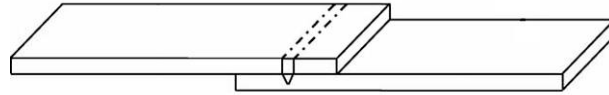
Configuration of the overlapping linear laser weld
